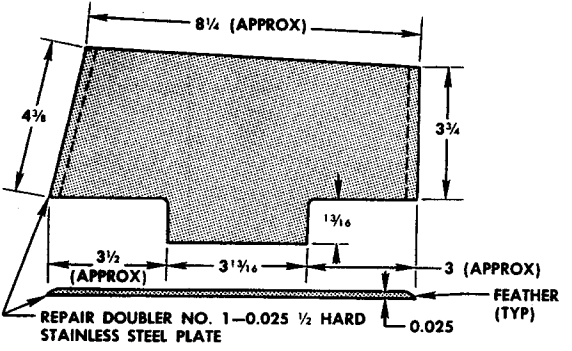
Wing Skin at Auxiliary Fuel Tank Pads (Sheet 2 of 3)
